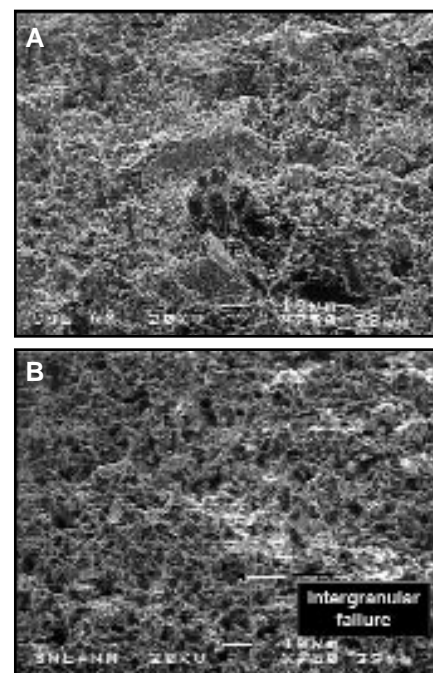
SEM photographs of the fracture surfaces of Thermo-Span/Au-Ni-Ti, four-point bend joints specimens. A — In the as-fabricated condition; B — following aging at 700°C (1292°F) for 200 days.
